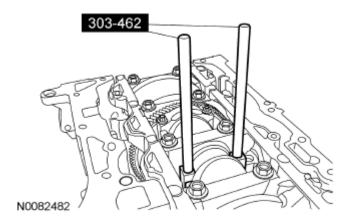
Identifying Connecting Rod Installer Courtesy of FORD MOTOR CO.
